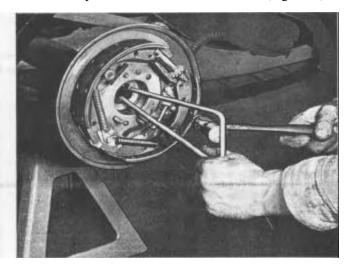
Removing Axle Shaft Oil Seal—J-481—Axle Shaft and Pinon Shaft Oil Seal Remover
